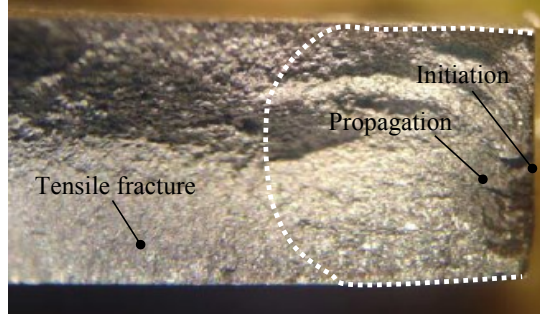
Fracture surface of a fatigue specimen after failure under fretting loading condition for flat bridge type contact experiment.
